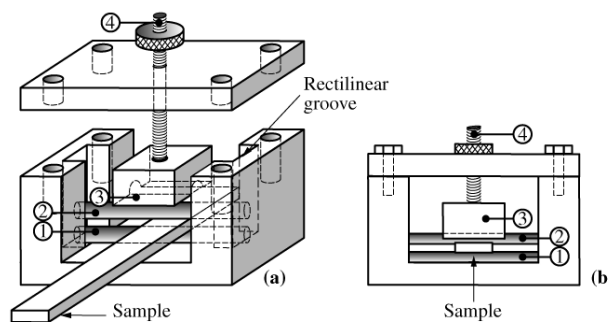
(a) Bending test sample holder for pseudo-clamping by means of two cylinders ① and ②. Compressional force is applied via a thick aluminum block ③ with clearance serving as a jaw with a screw and knurled knob ④. (b) Cross-section of the sample holder system
